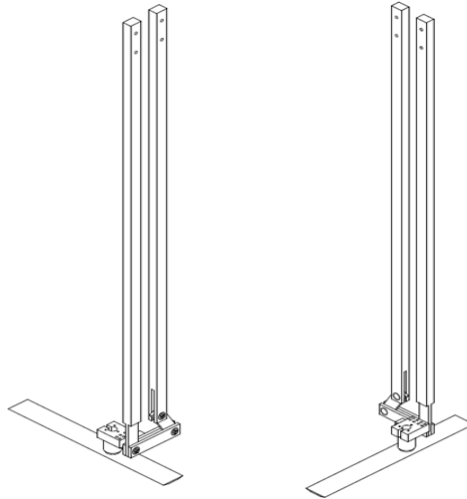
Sensor-wing-rods assembly. Taken from a past Uc3m student thesis [28].
